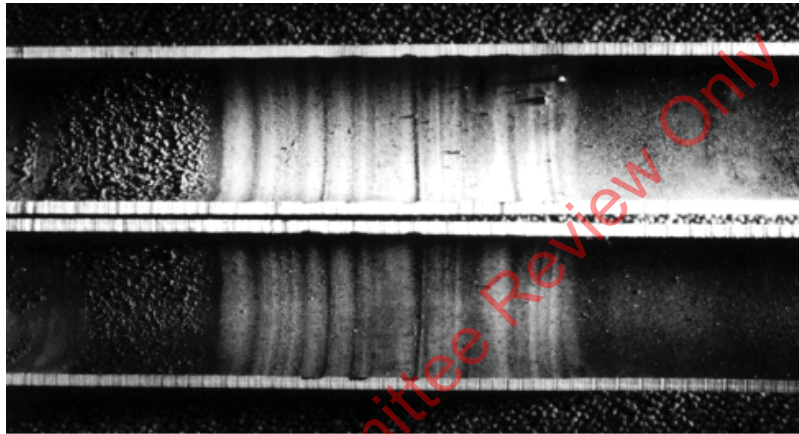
Tube Damage Caused by Mechanical Cleaning Equipment
